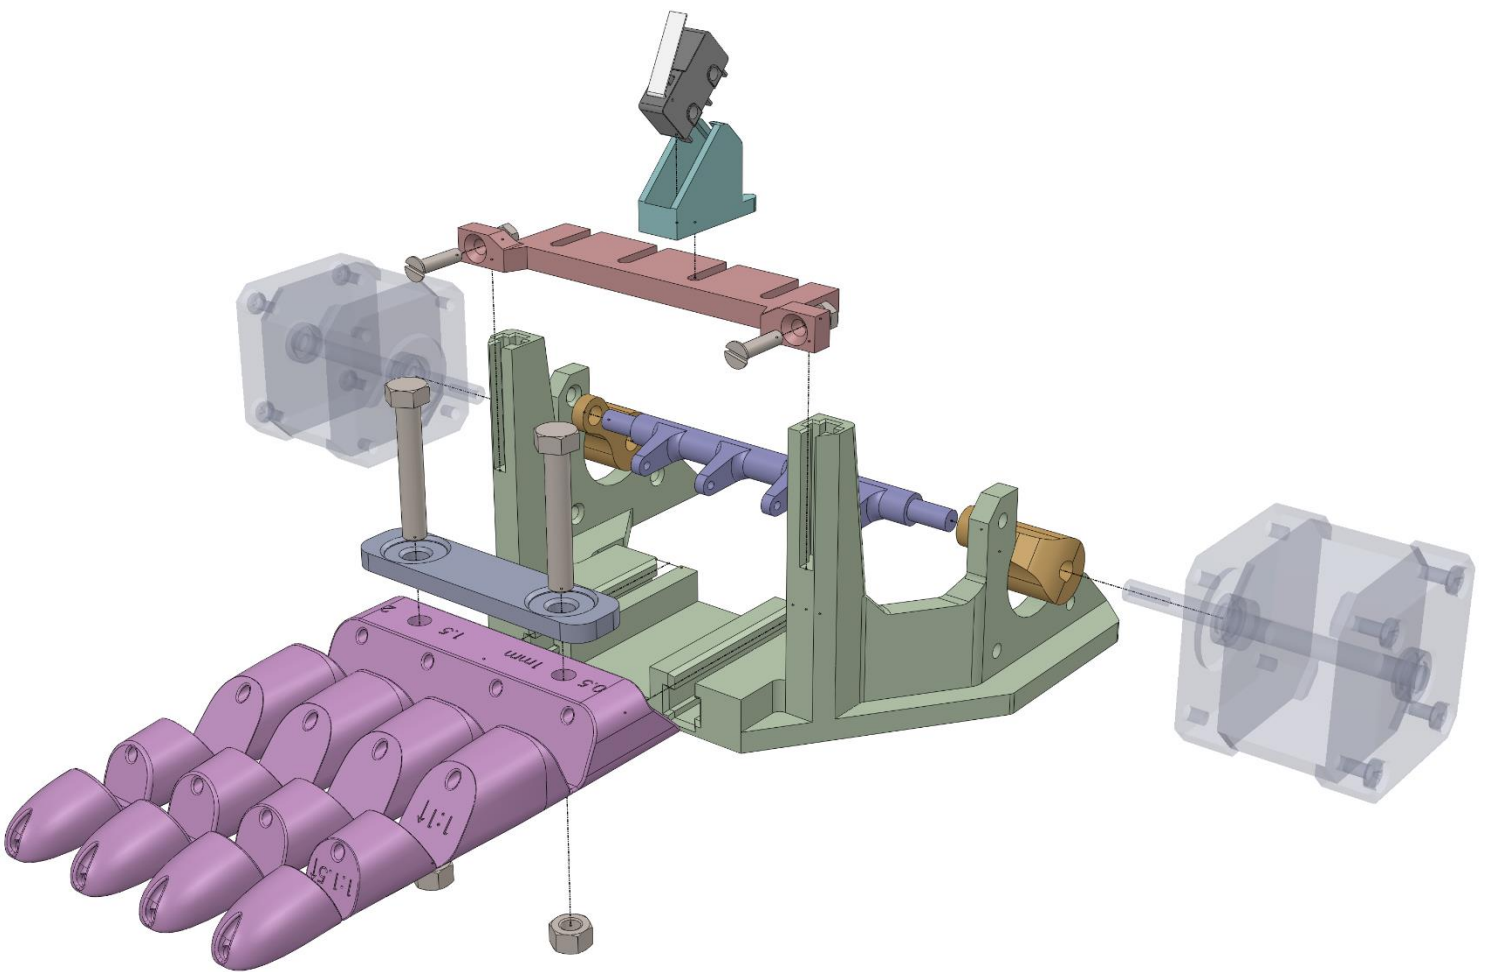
Exploded view of the testbench setup for fatigue testing. Note that only one of the four microswitches is shown
